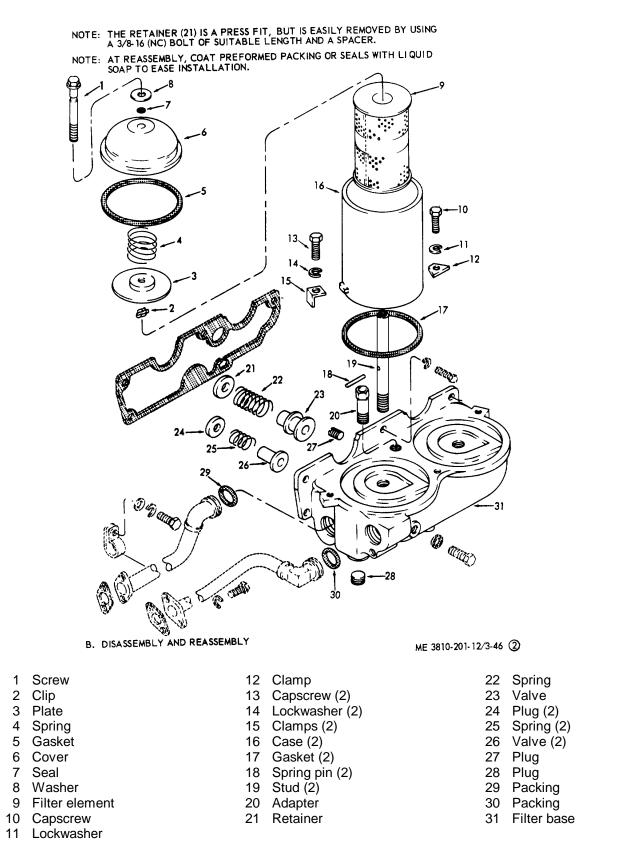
Oil filters, removal, disassembly, reassembly, and installation for engine Model D333TA (sheet 2 of 2).
